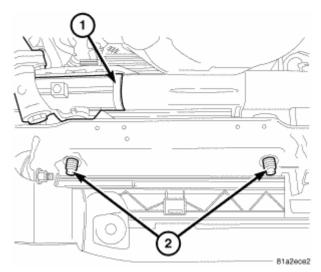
Identifying Steering Gear & Gear Mounting Bolts Courtesy of CHRYSLER LLC
